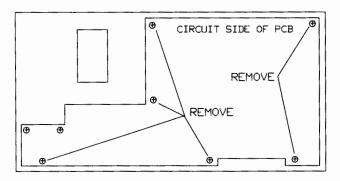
Pertec-compatible Interface PCA Mounting Screws.
